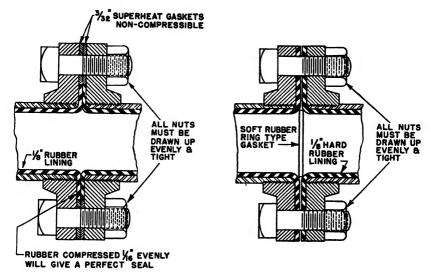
Application of gaskets to flanged joints in rubber-lined pipe. The drawing at left shows a joint in pipe lined with soft rubber; the one at right, a joint in pipe lined with hard rubber.
